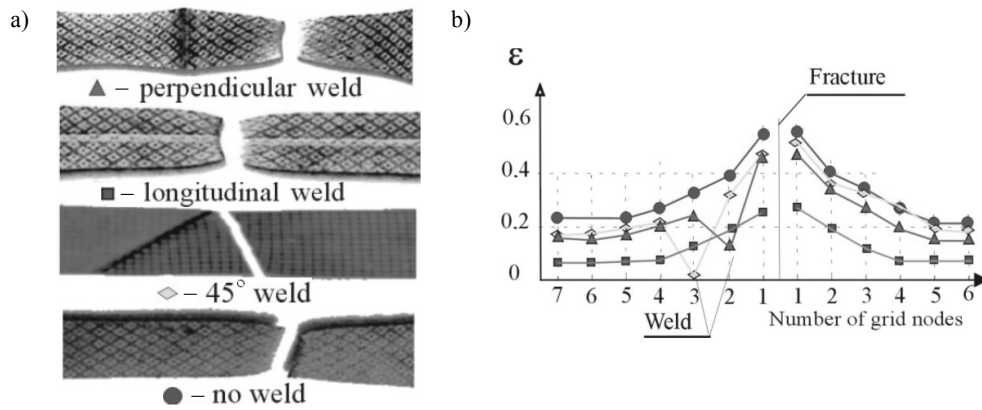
Results of tensile tests: a) pictures of samples (sheet thickness 1.2 mm) fractured during tensile tests; welds are oriented in different ways to the loading direction, b) distributions of local strains along tensile load direction
